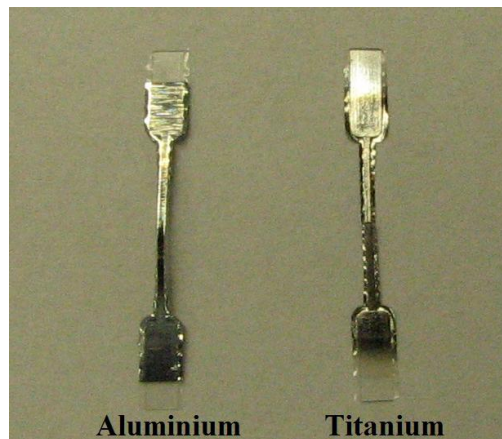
The micro injection molded weld line tensile samples with different metal coating layers
